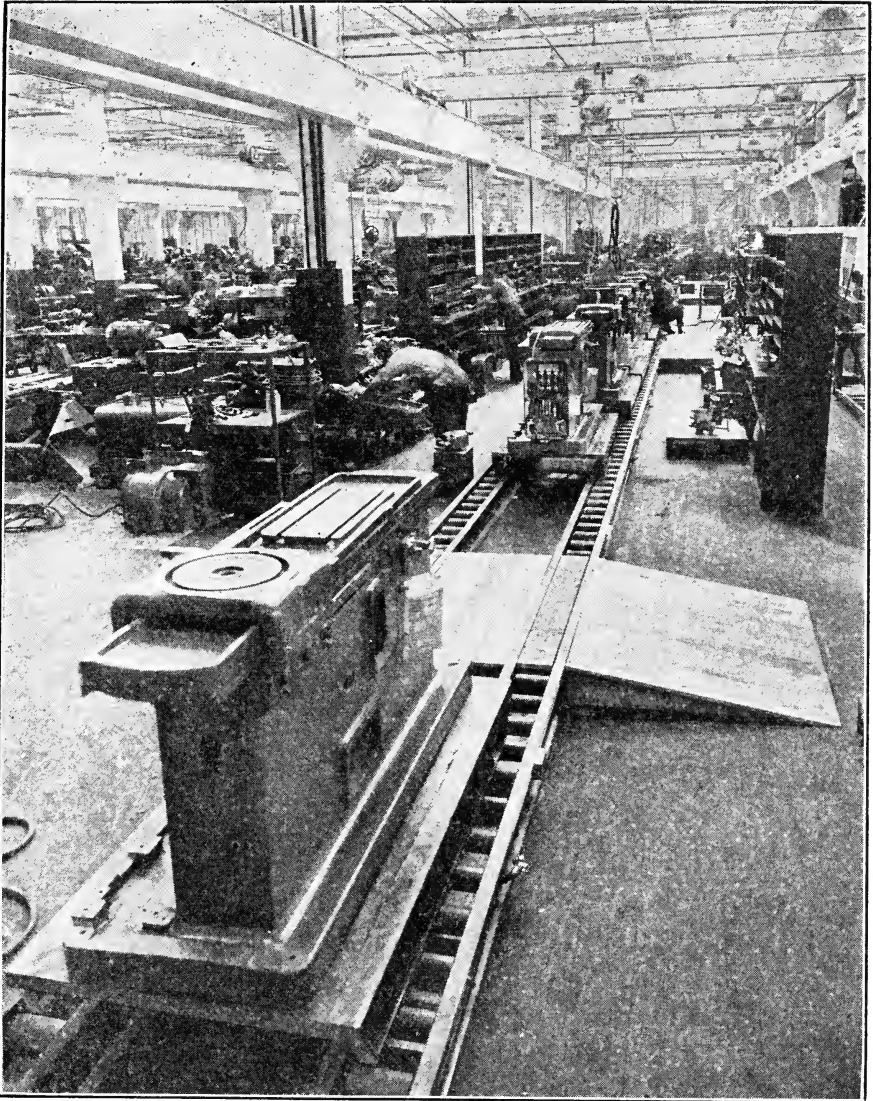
Roller conveyors and skids used to transport machine tools in assembly. At the end of the line a lift truck runs between the conveyors and picks up the complete machine on its skid. View is from starting end of line. Note bridge to allow crossing the line. (Courtesy of Heald Machine Company.)
